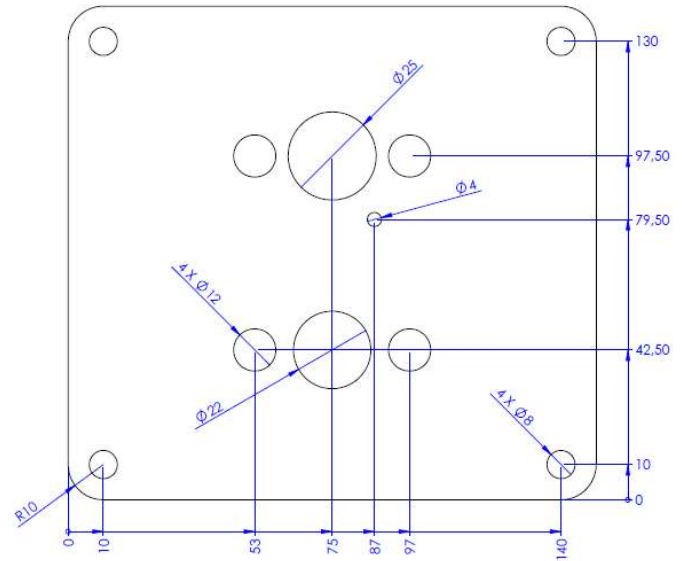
Shows the dimension of interface plate and recommended gasket dimensions.
